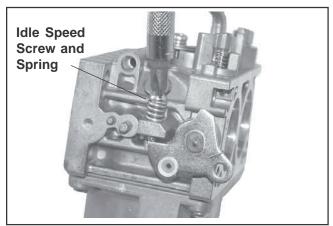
Installing Idle Speed Adjusting Screw and Spring.
